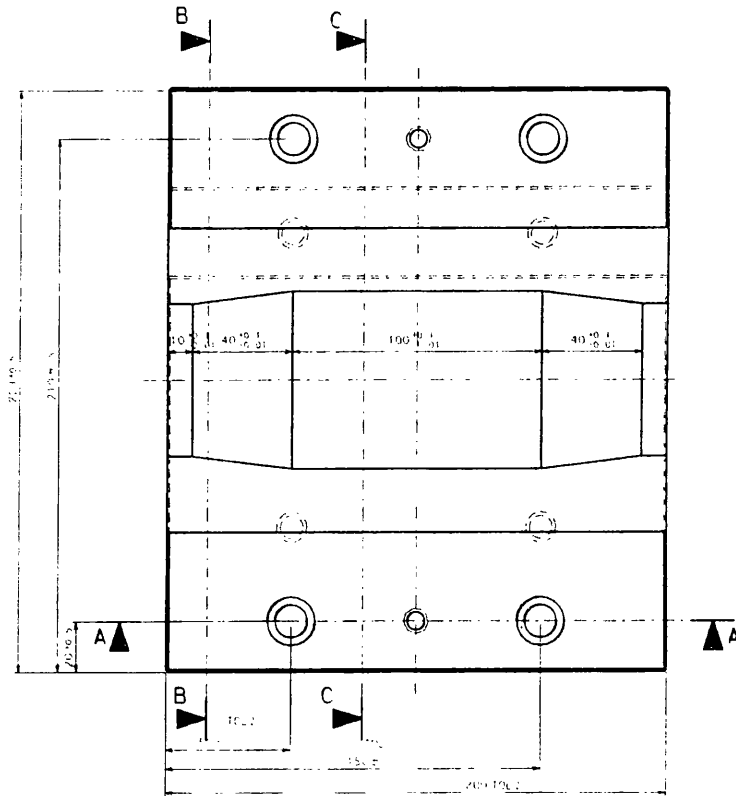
Image of CAD drawing of lower hydroforming die tool (expansion) segment
